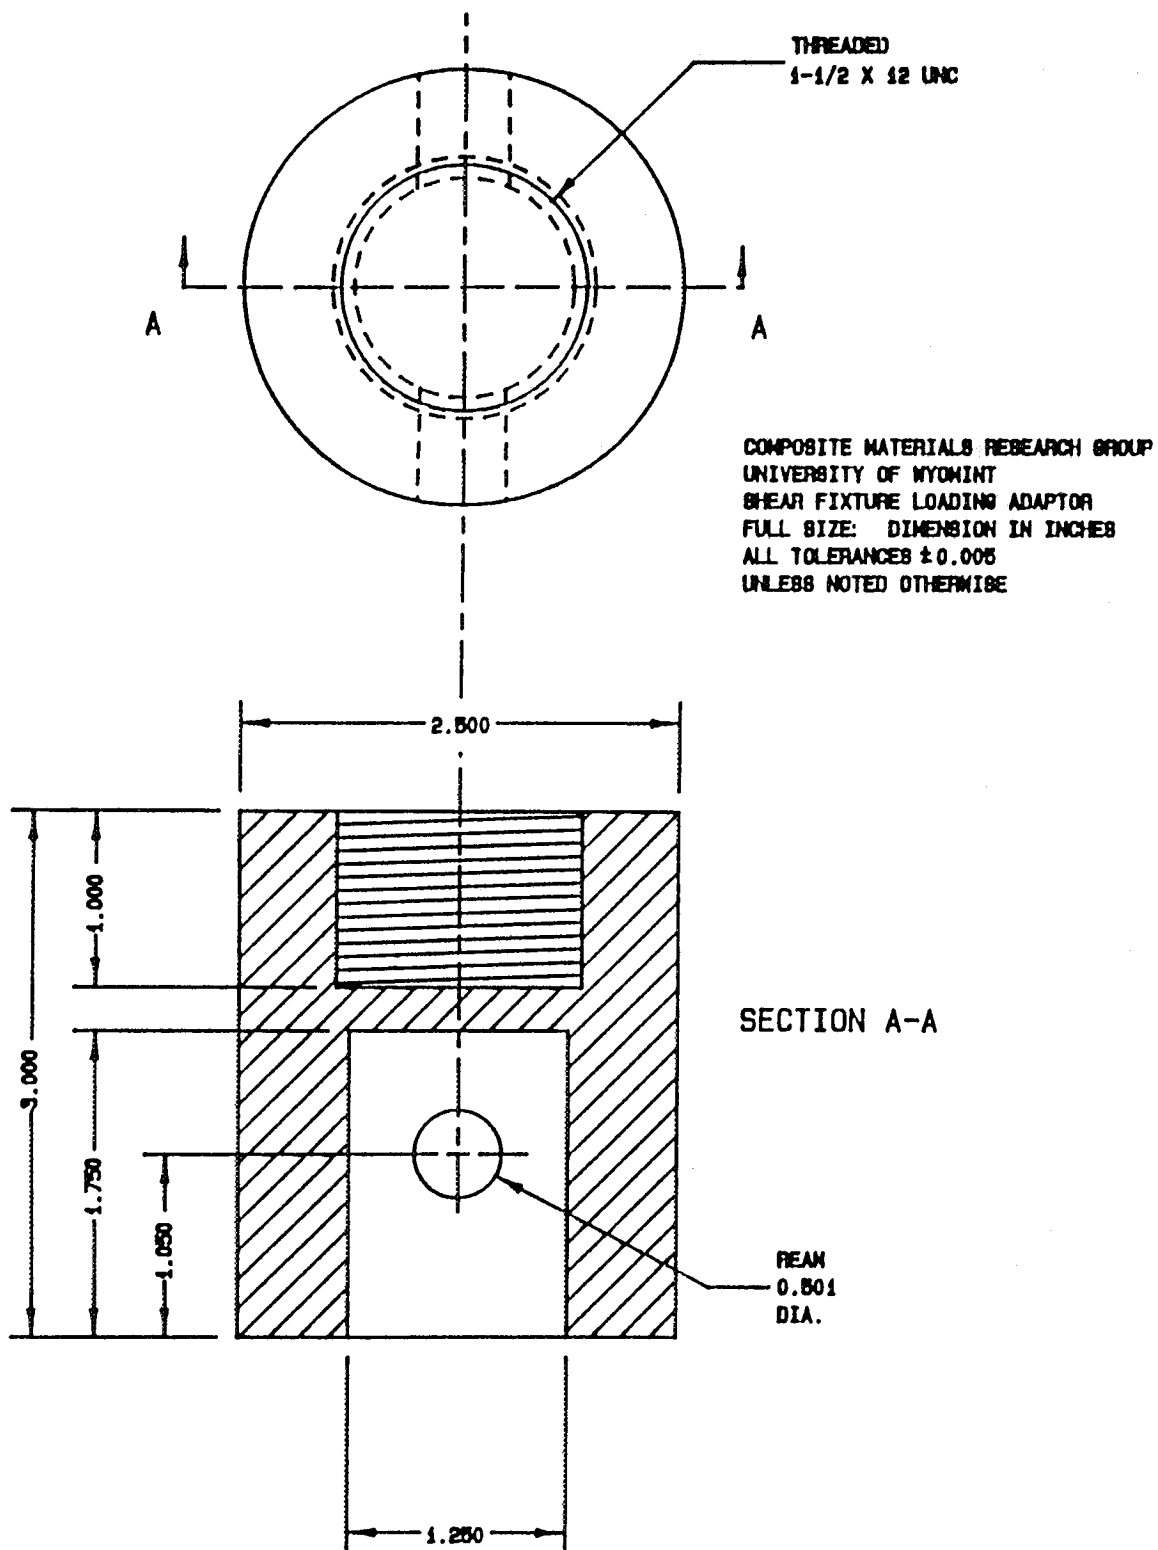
Iosipescu Shear Fixture Testing Machine Adaptor.
